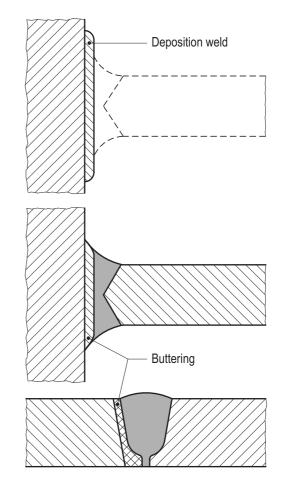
Examples of deposition weld and buttering for connecting welds
